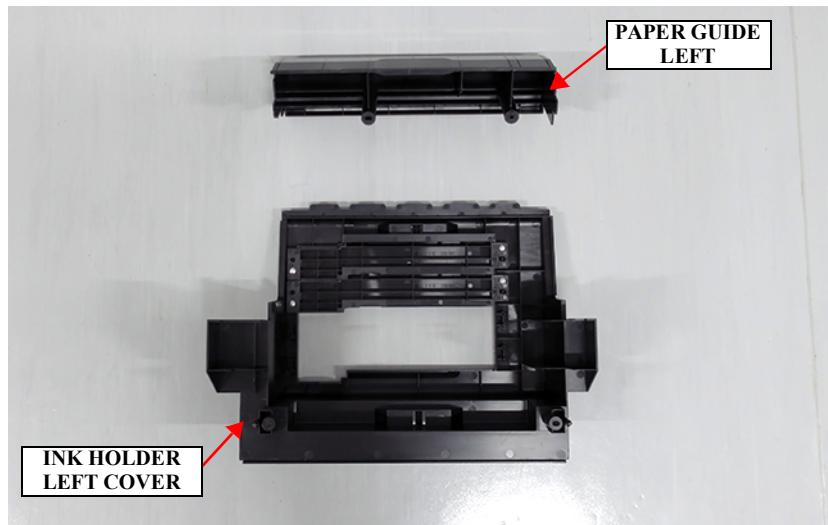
Removing the PAPER GUIDE LEFT / INK HOLDER LEFT COVER (3)
